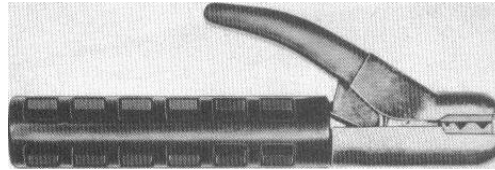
The electrode holder grips the electrode at the correct angle for welding.
